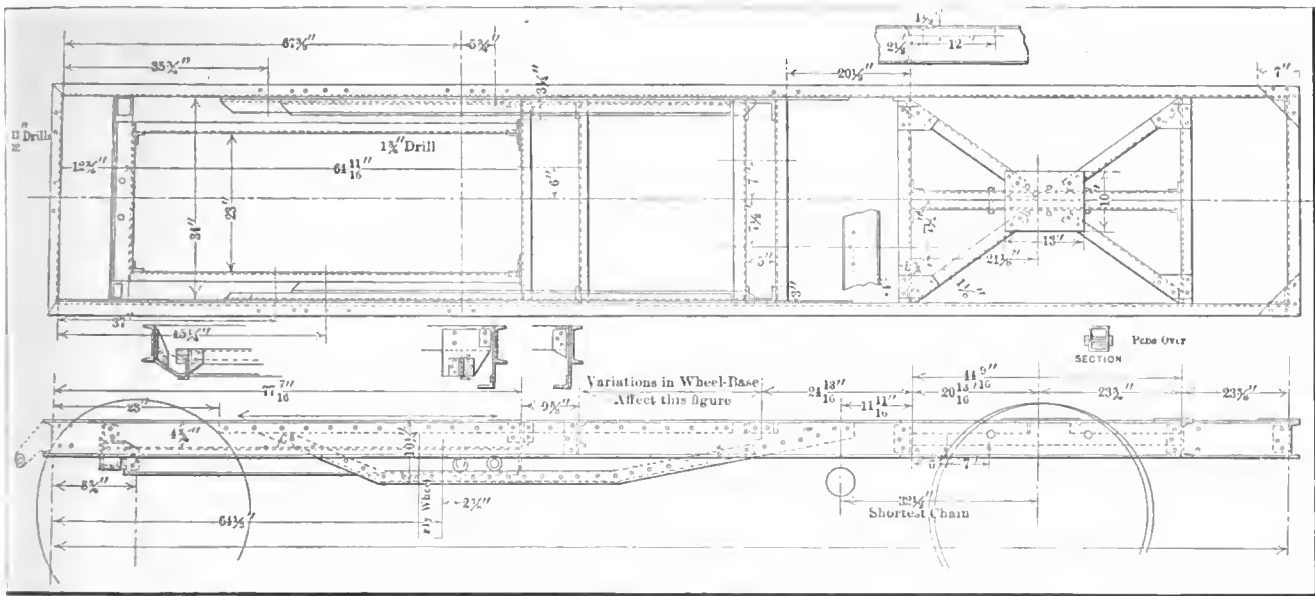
Alden Sampson frame in plan and elevation,, channel section with flanges out, designed for heavy trucking service
